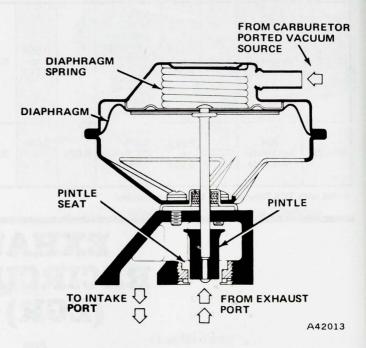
J-120 EGR Valve Without Back-Pressure Sensor
